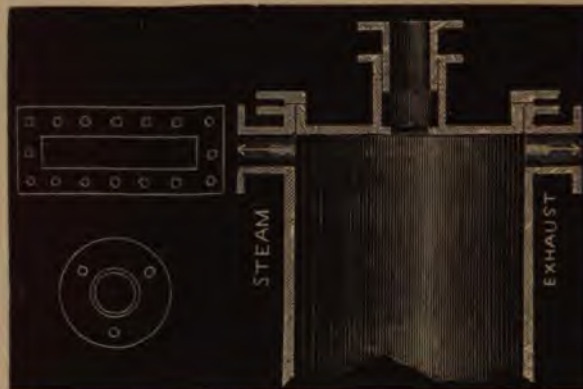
ARRANGEMENT OF BOLTS IN CYLINDER COVER.
